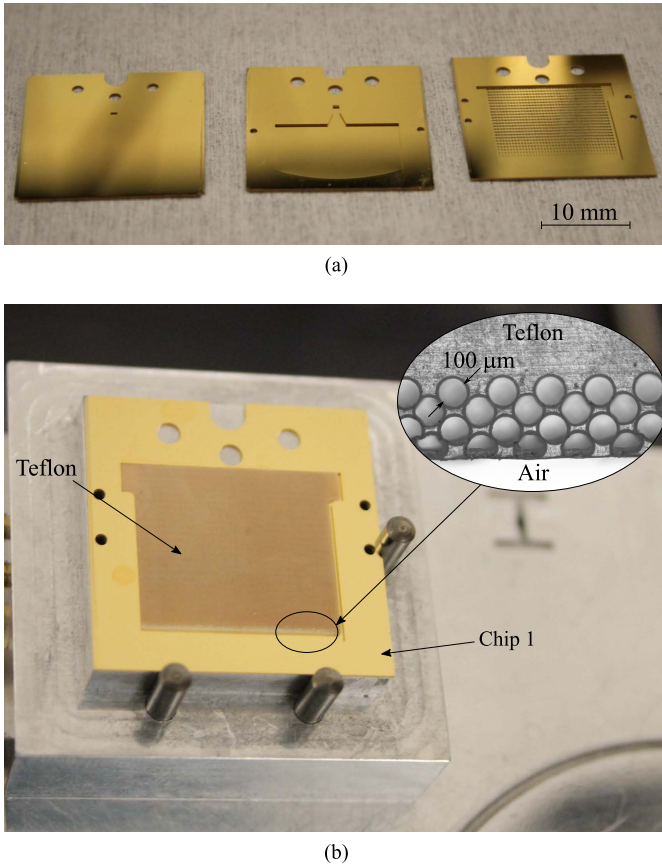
Pictures of (a) 3 chips after metallization required to assemble one antenna. (b) CNC-milled Teflon sheet inserted in micromachined chip 1 during assembly process.
